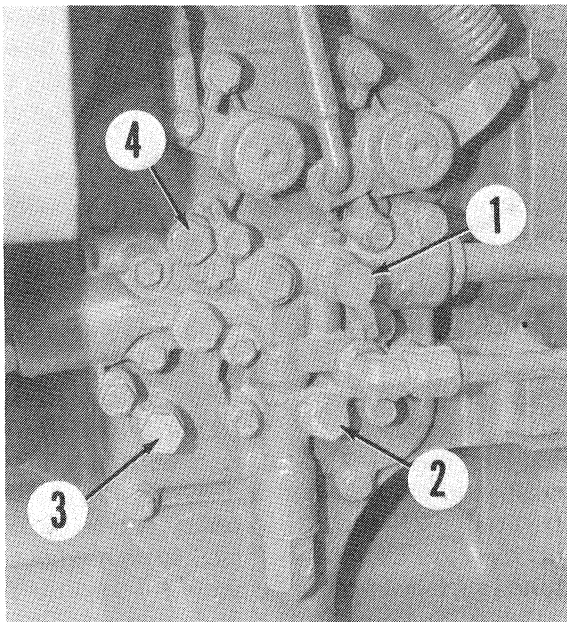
View of pressure control valve used on Quad-Range models. Install 300 psi (2000 kPa) pressure gage at test port (1) to check system pressure.
